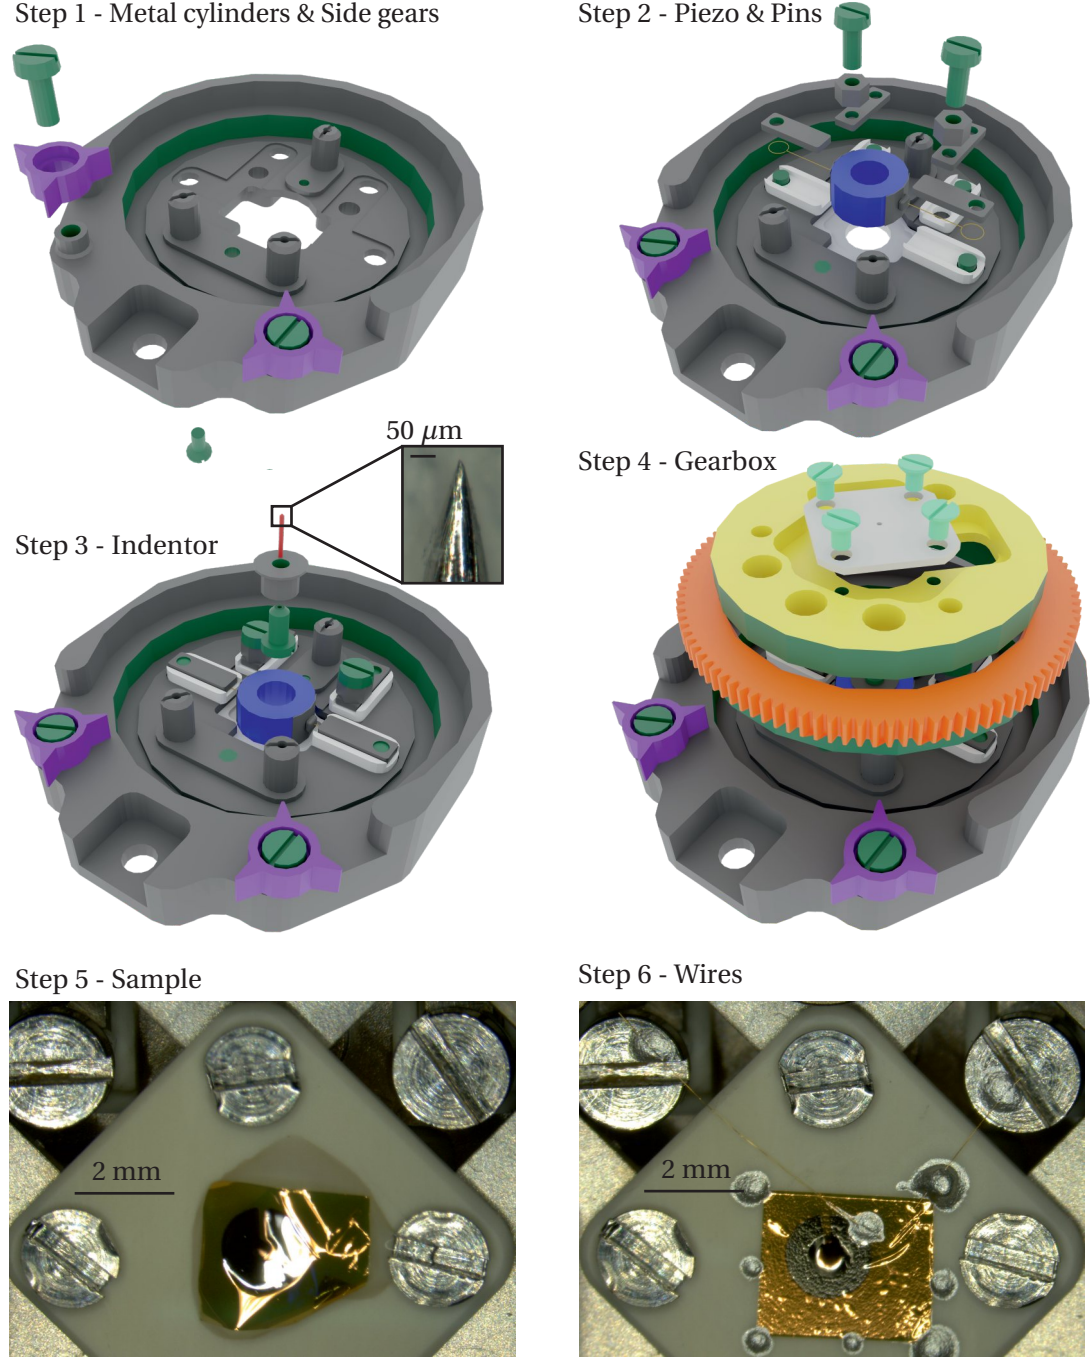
Exploded view of step-by-step installation instructions of the strain and gate-controllable sample holder. The green-colored surfaces in Step 1-4 are threaded parts.
